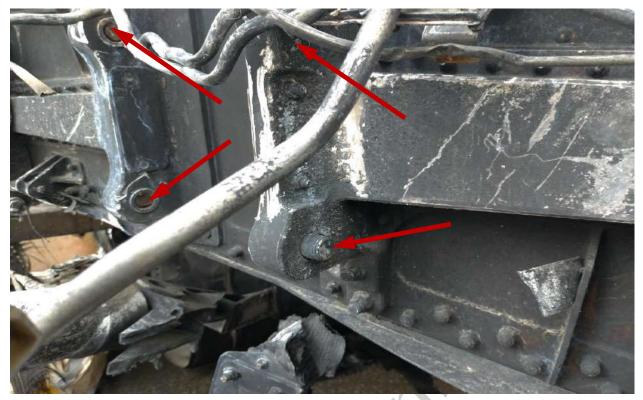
The left MLG attachment A fitting on the rear spar adjacent to rib 3, the attachment A fuse pins («weak links») are sheared
